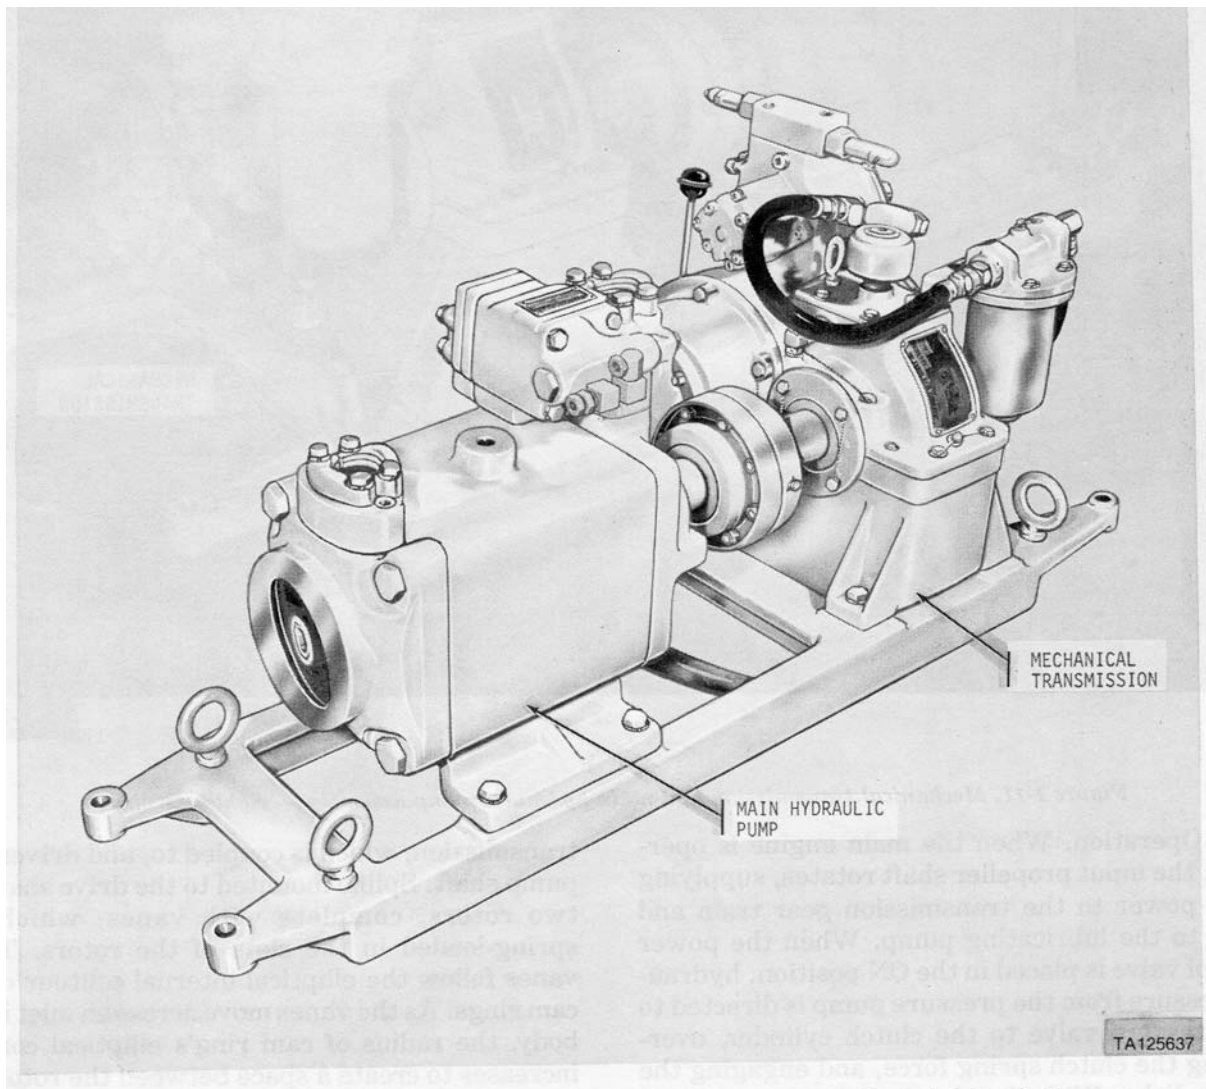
Mechanical transmission and main hydraulic pump assembly - left front view.
